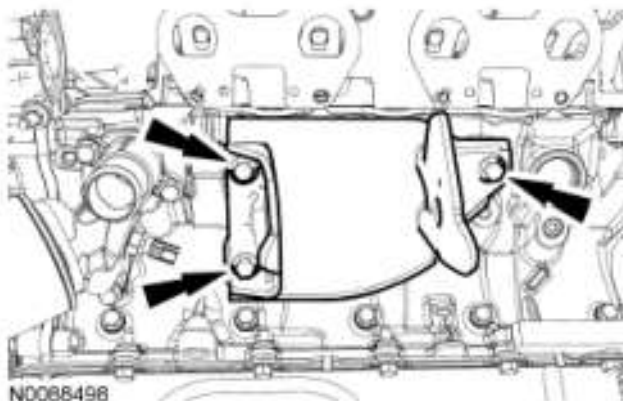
Locating Bolts And LH Engine Support Insulator Bracket
